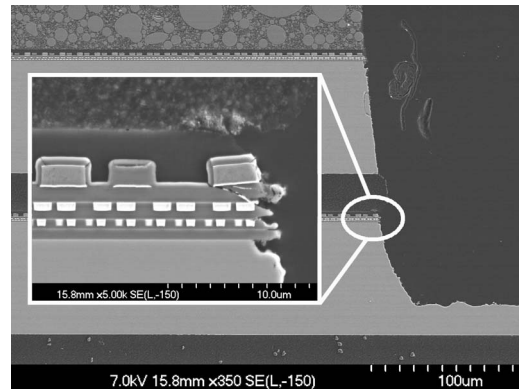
Mechanical cross section through the laser edge machined with a 355 nm DPSS laser, including detailed view of the cut IC structures with small HAZ
